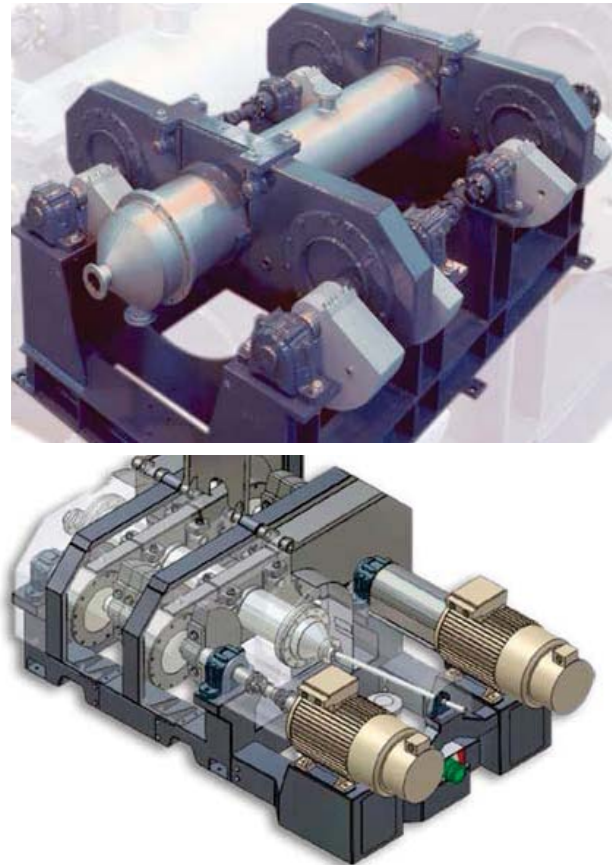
Centrifugal Tube Mill image and illustration (Siebtechnik, 2017)
